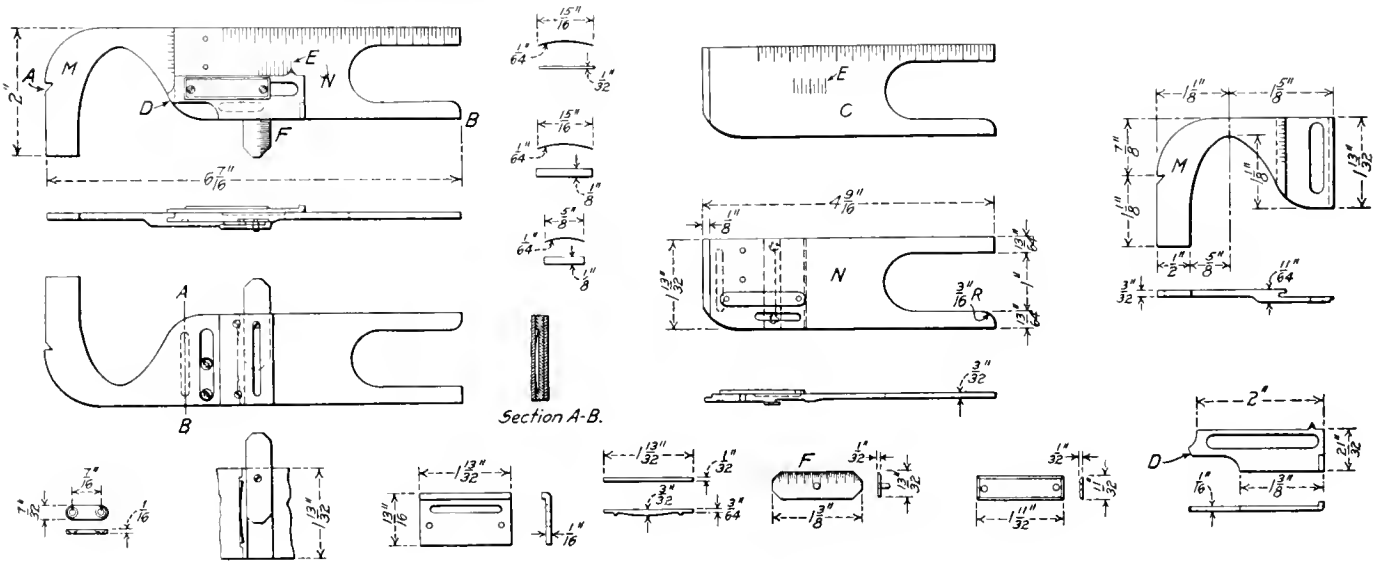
Tire and Flange Gage for Driving and Trailing Wheels.
